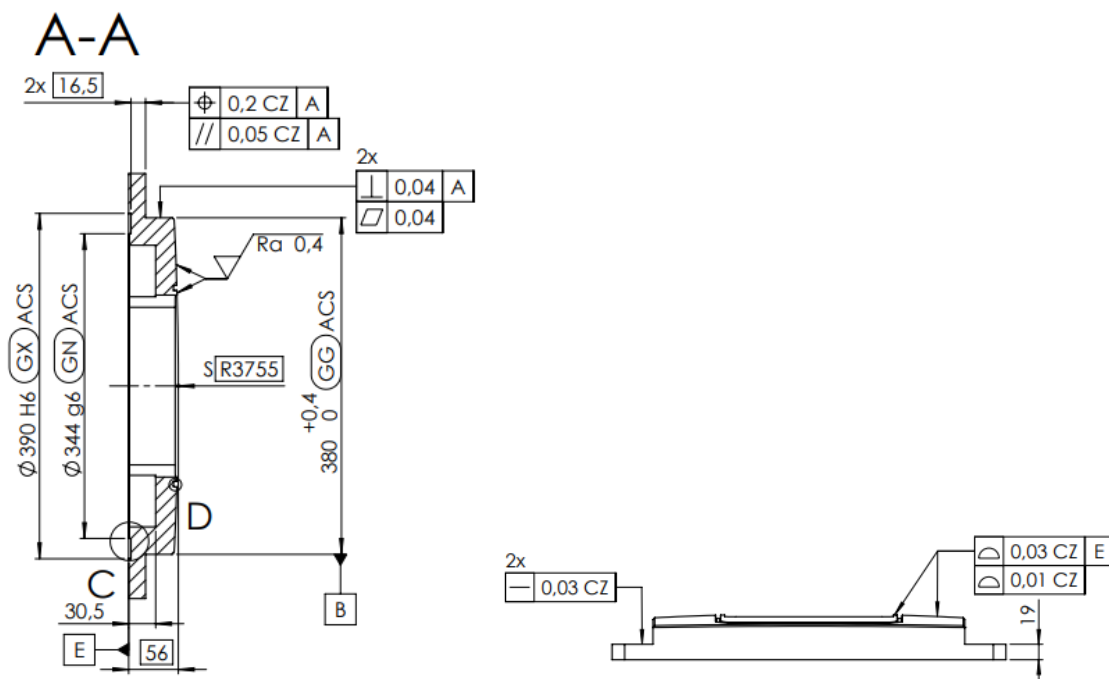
Example of drawing views of spheric workpiece (attachment 14)
